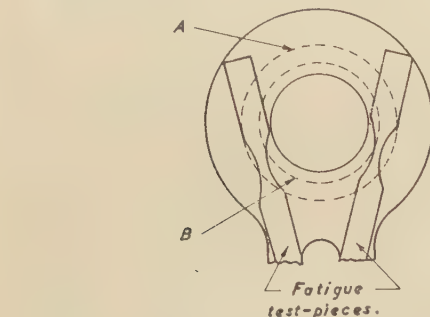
FIG. B.—Method of Sectioning Articulated Rods, showing approximate position of (A) gudgeon-pin bore and (B) wrist-pin bore, of finished-machined articulated rod.
